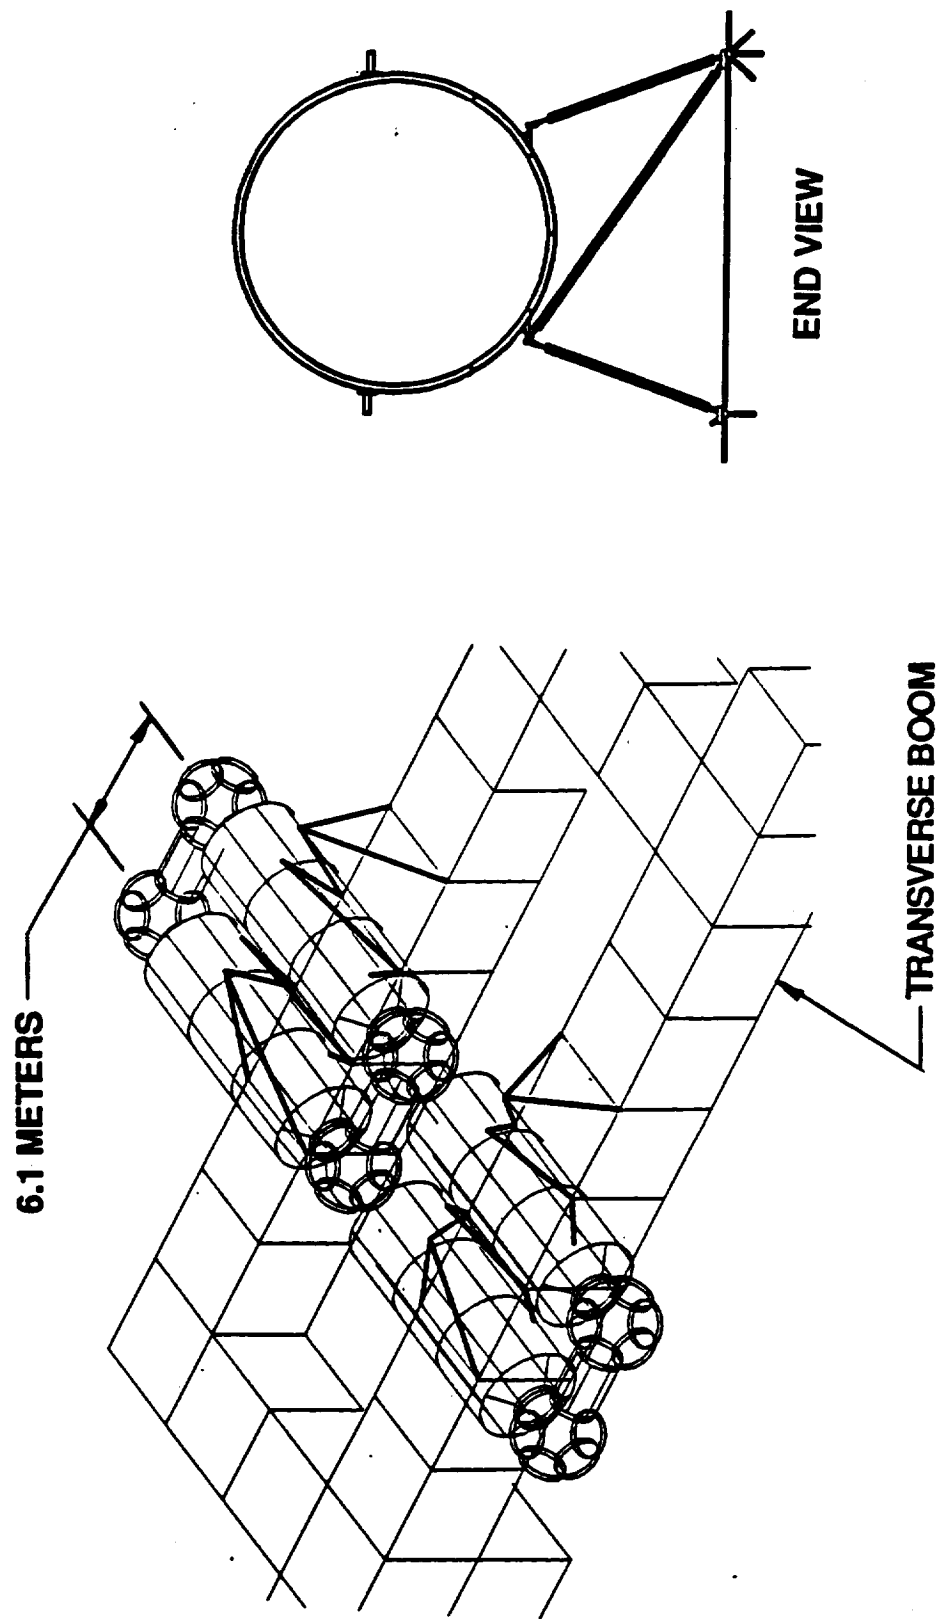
Dedicated Attachment Design Selected for Bridge Truss Structure
